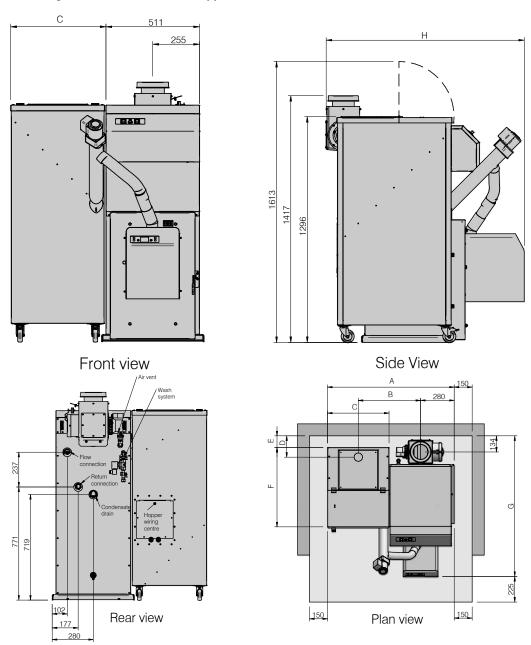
Boiler and hopper dimensions and clearances – single boiler with left hand hopper
